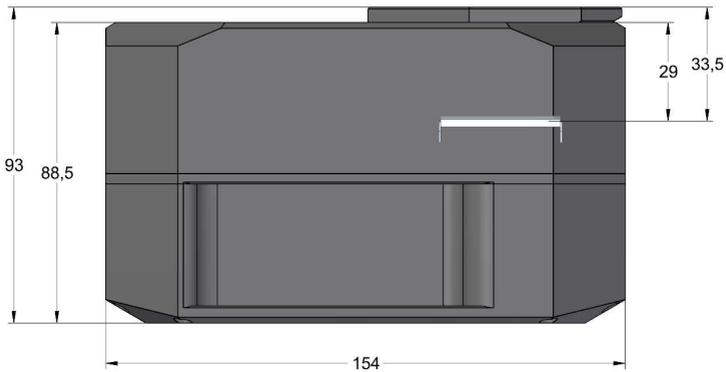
G3 camera head with Internal Filter Wheel and Enhanced cooling side view dimensions
